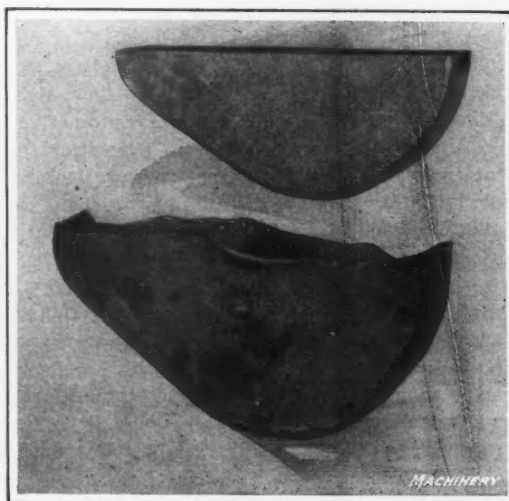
Steel Shell (before and after trimming) from which the Gear Guard shown in Fig. 17 is made
